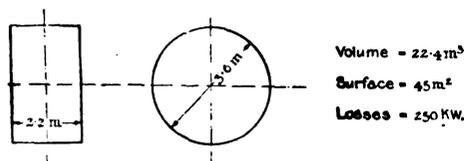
OVER-ALL DIMENSION OF HIGH-SPEED MACHINE.
